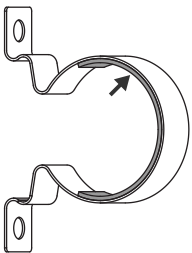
Included Mounting Hardware with Anti-Rotation Pads
